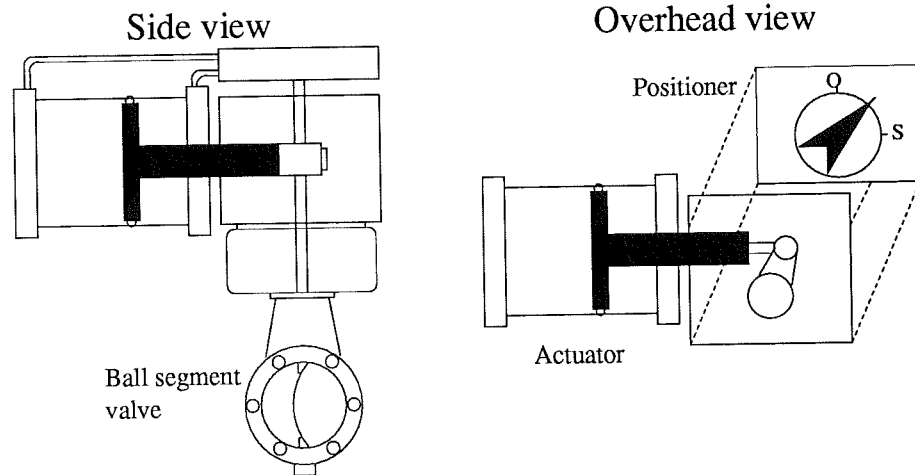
The positioner-actuator mounted on the ball segment valve.
